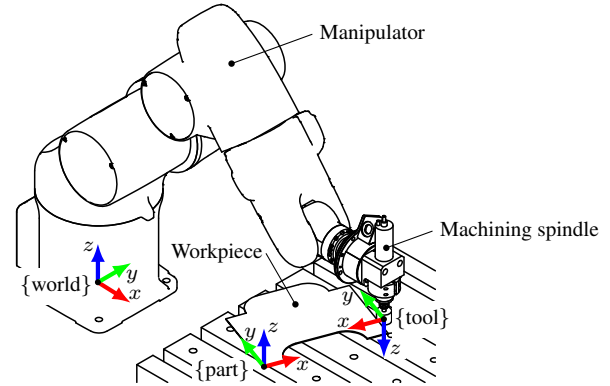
A robotic manipulator performing a force-controlled edge-processing operation on a sheet metal part, supported by a vacuum table.
